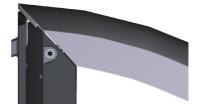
Location of Torx T25 bolts to release, adjust and fasten the enclosure
